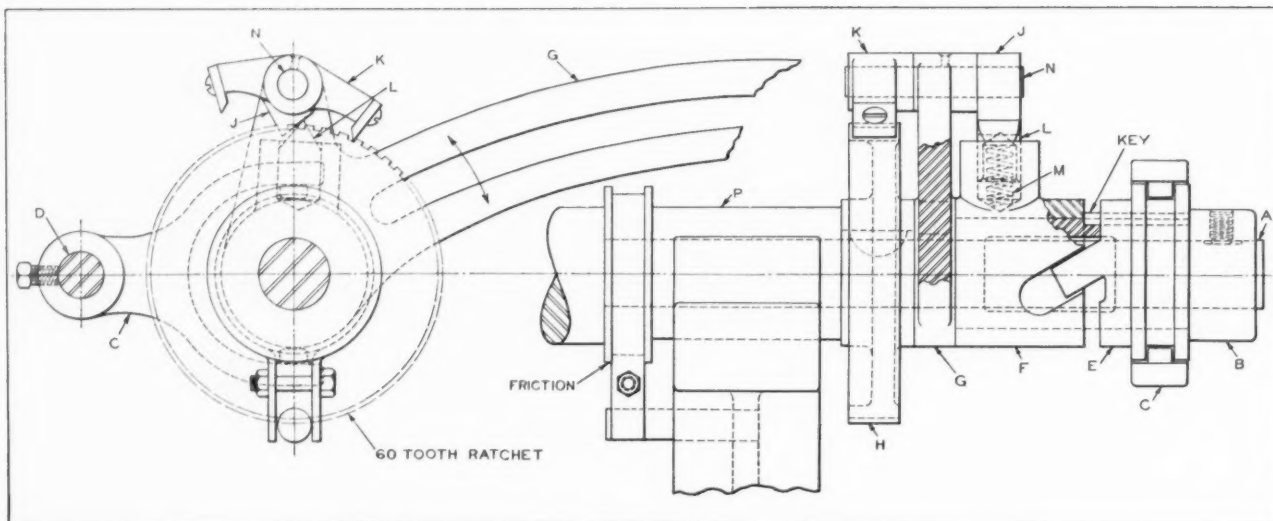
Feed-screw Reversing Mechanism Used on Machines Shown in Figs. 2 and 3
